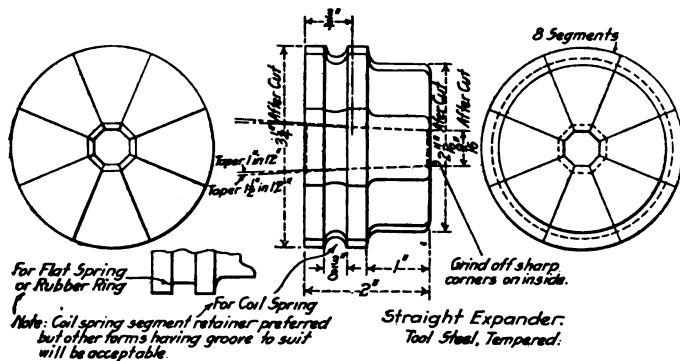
Straight Sectional Expander for Brick Arch Tubes.
